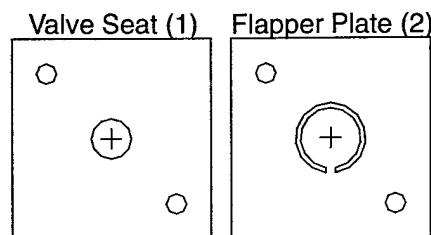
Flapper valve laminates showing pivoting flapper and orifice plate.
